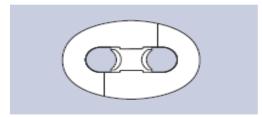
Connecting link kenter type (Source: Vryhof Anchors)
